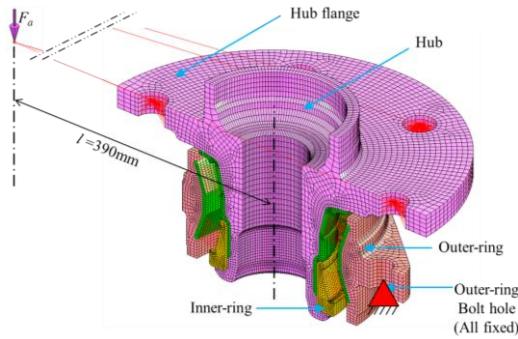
Boundary conditions of stiffness analysis for tapered roller wheel bearing unit
